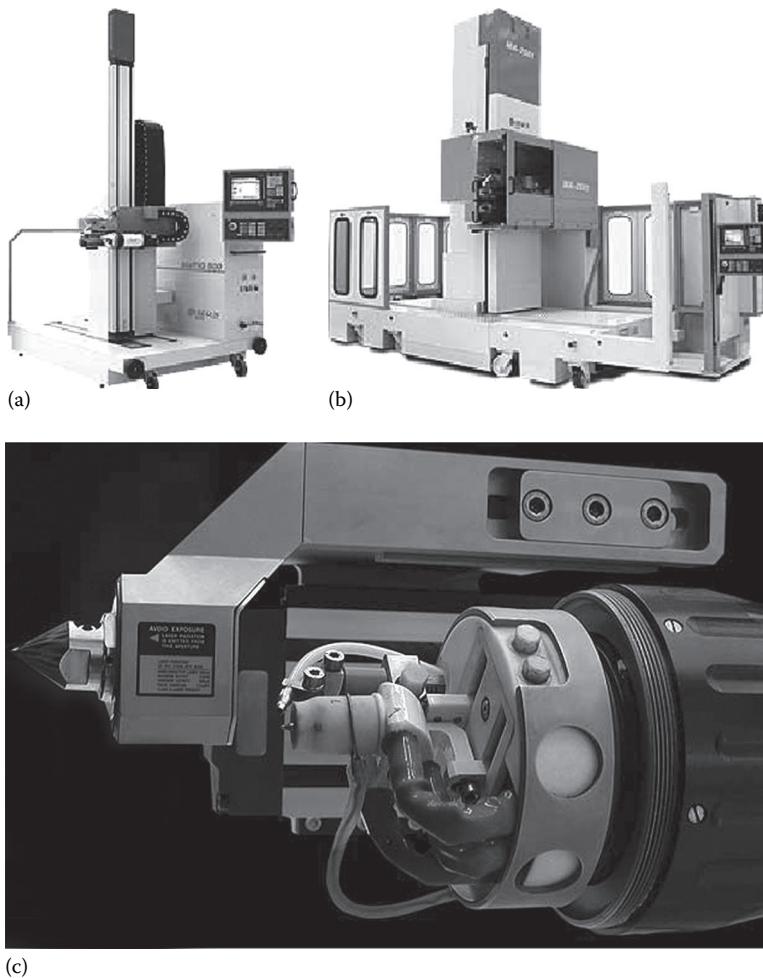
(a) Tube-to-tubesheet TIG orbital welding automatic positioning system for tube bundles of tubes from 1/4 to 2 in. (9.5 to 50.8 mm), (b) automatic rolling, facing, and welding double-axis working center, and (c) tube-to-tubesheet TIG orbital welding head. (Courtesy of Maus Italia F. Agostino & C.s.a.s., Bagnolo Cremasco (Cr), Italy.)
